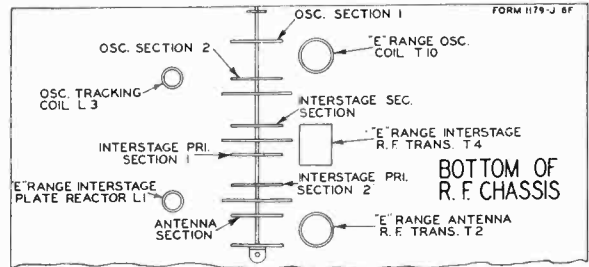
Bottom View of Chassis Showing Coil and Switch Section Location
